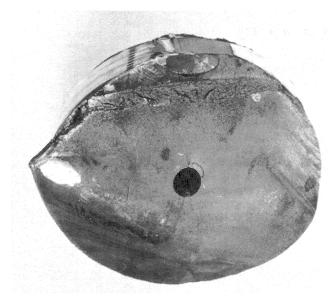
Hydrogen Induced Fatigue Fracture of Reciprocating Pump Crank Shaft. The failure plane is located at the undercut step on the journal end. Note the spalled chromplating on the journal surface.
